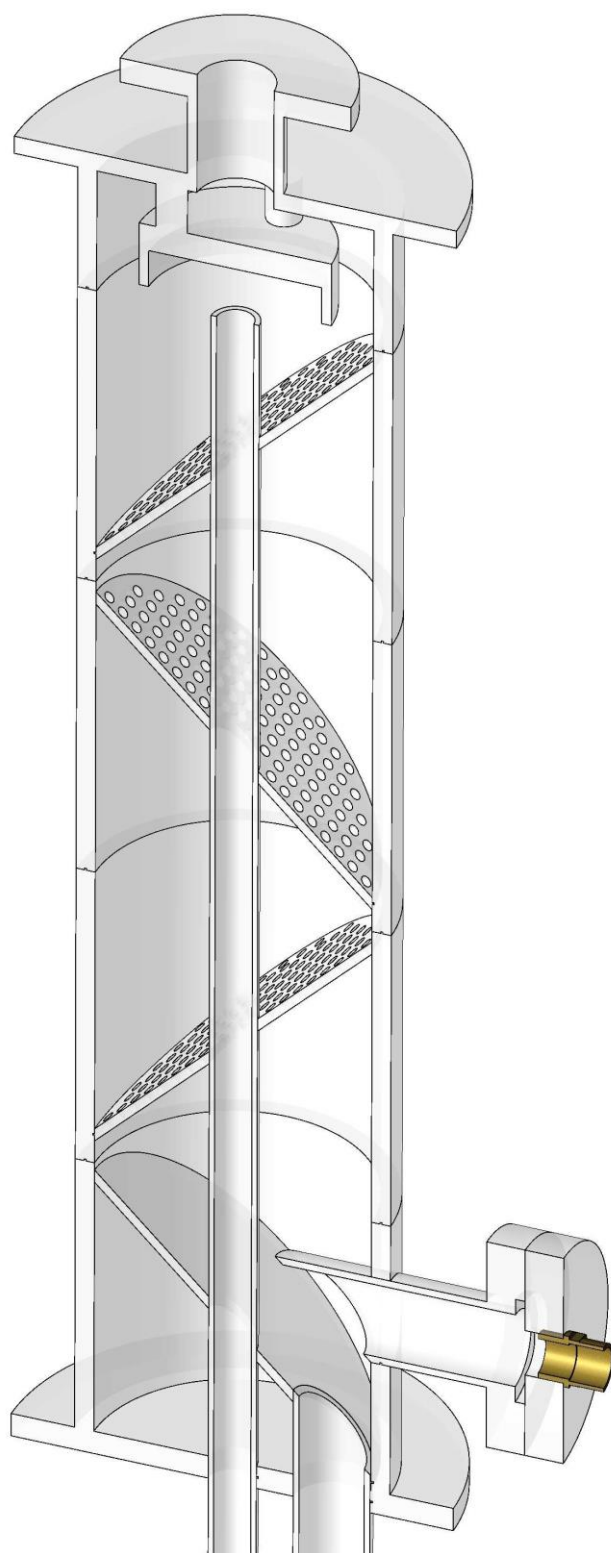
High-angle 3D CAD section view of the novel CFB adsorber
